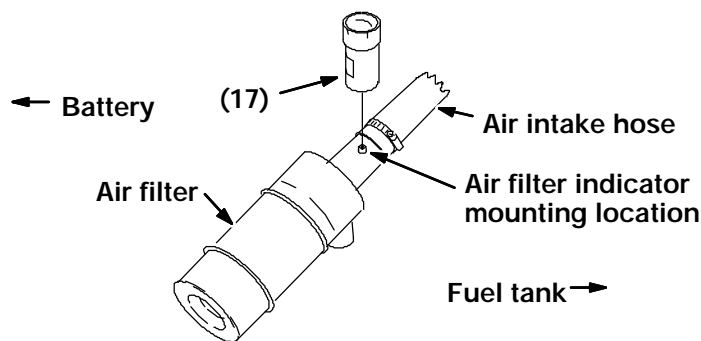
Installation of Air Filter Indicator on Engine Air Filter
